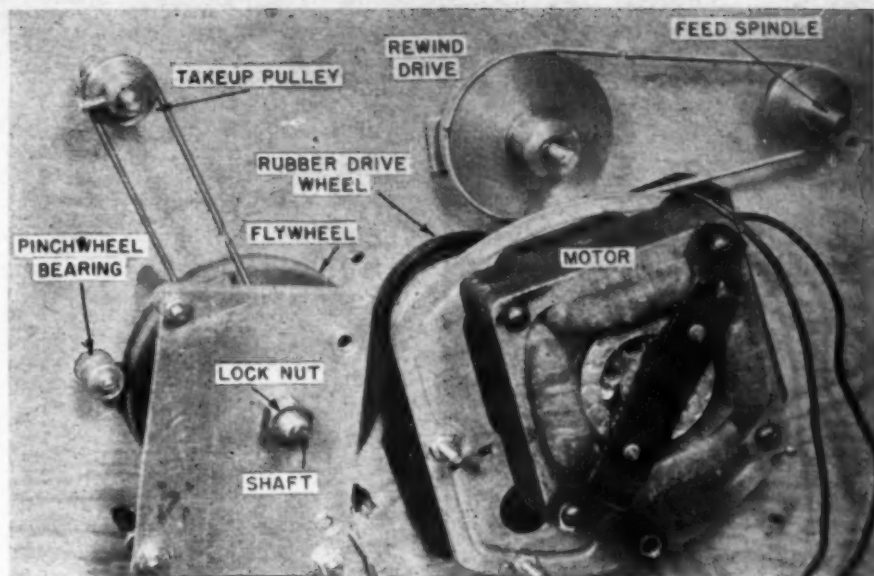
Underside view of top panel, shows details of mechanical assembly.
